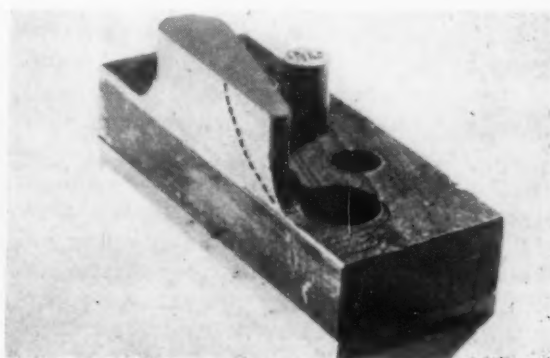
The corner of this die broke off as indicated by the dotted line. Instead of welding broken corner back on, it was replaced with built-up weld deposits. Photo was taken after repaired die had been in use for weeks.
